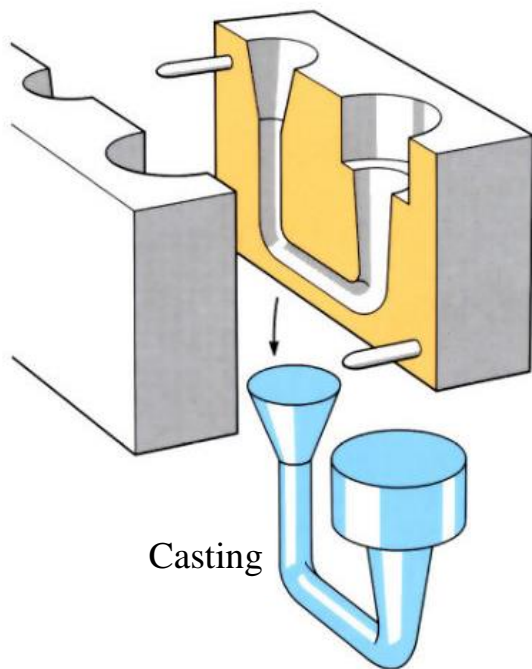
Die set opened and casting ejected, fettled and heat treated
